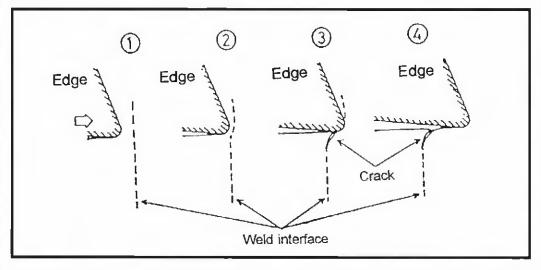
Schematic illustration of crack formation process from hot shearing. 1) The influence of the shearing edge does not extend to the interface of the gas pressure weld. 2) The shearing edge goes forward, and the section near the interface of the gas pressure weld moves into the plastic deformation area. If metallic bonding strength is very low, a crack occurs at this step. 3) The edge passes the interface of the gas pressure weld. When metallic bonding strength is low, a crack always occurs at this step. 4) The crack, which occurred at step 3, is on the surface; therefore, it is possible to reliably detect this flaw by appearance or by magnetic particle testing.
